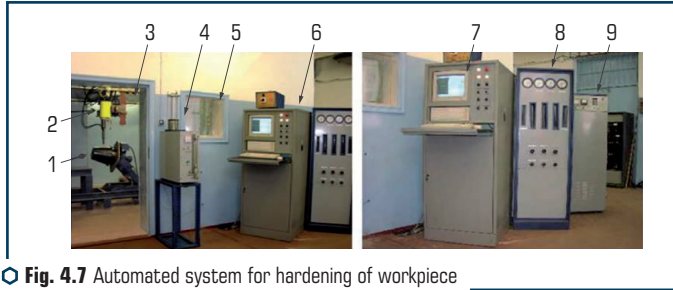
Automated system for hardening of workpiece surfaces and deposition of coatings
